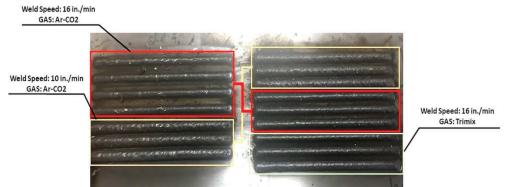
Single bead welds of MAR 250 with different welding speeds and shielding gas mixtures
